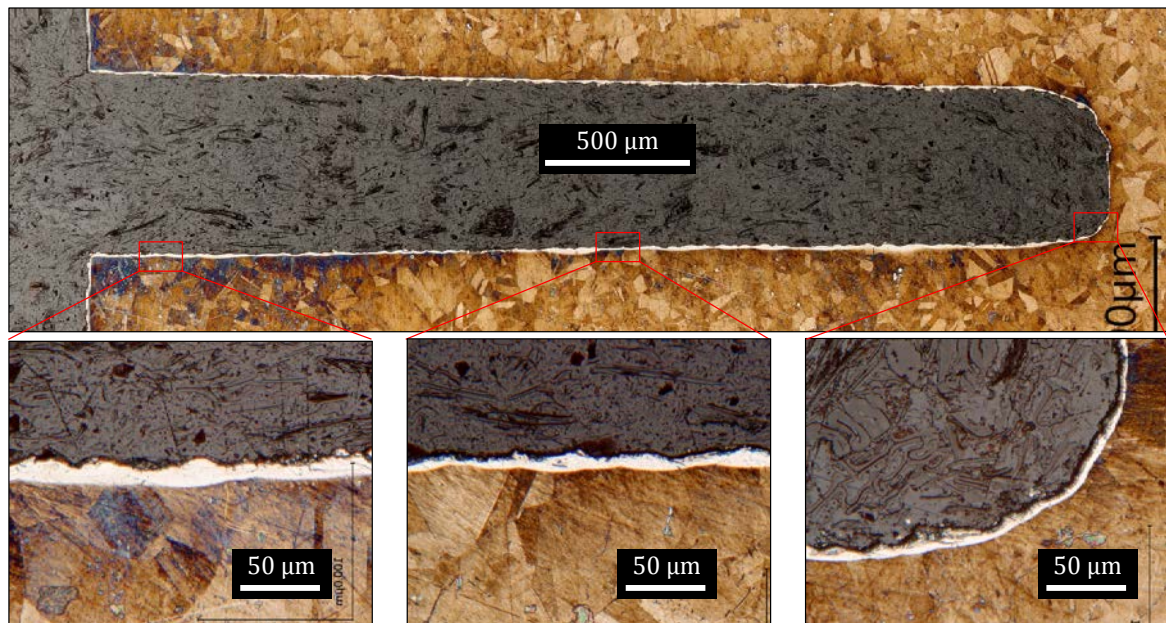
Re-solidified layer analysis (in YZ plane) of 'H-shape' slot machined using ODEM+EDM shaping with $\phi 0.5$ mm tool in Inconel 718.
